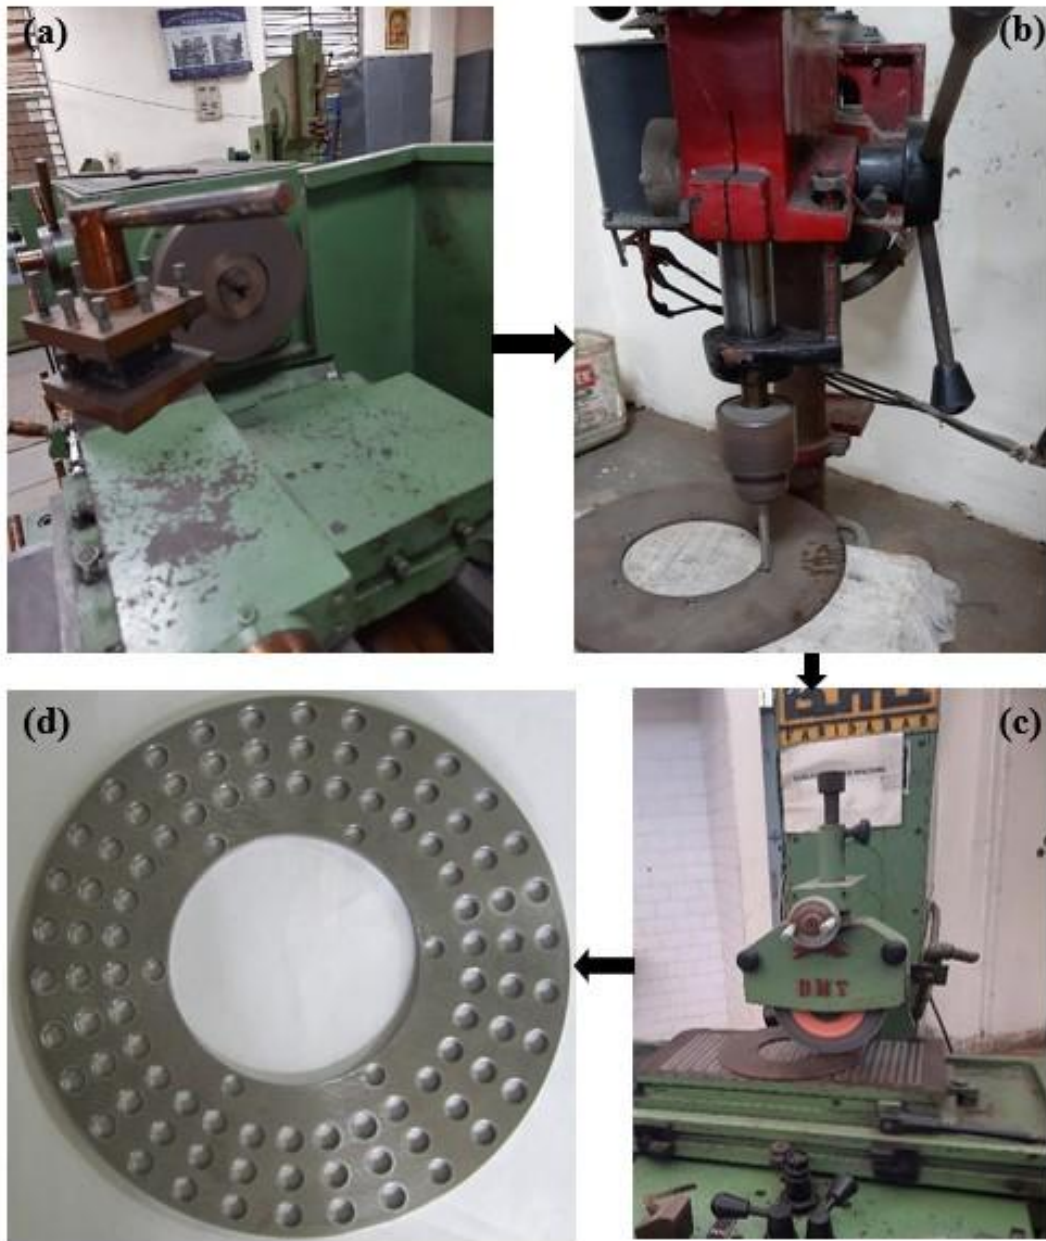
Brake disc specimen preparation (a) machining, (b) Surface drilling, (c) Surface finishing, (d) prepared disc
